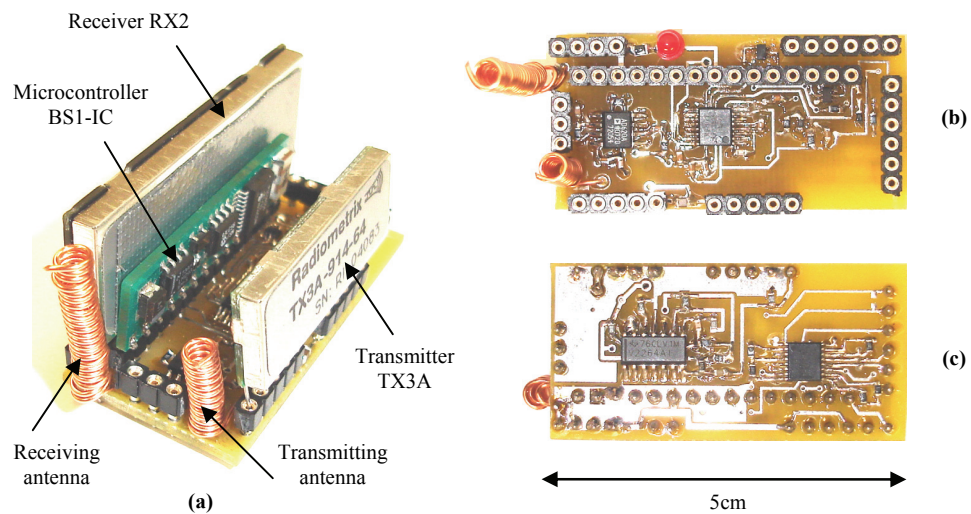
(a) The telemetric device without batteries. (b) Front side of the PCB without microcontroller and wireless modules. (c) Back side of the PCB.
